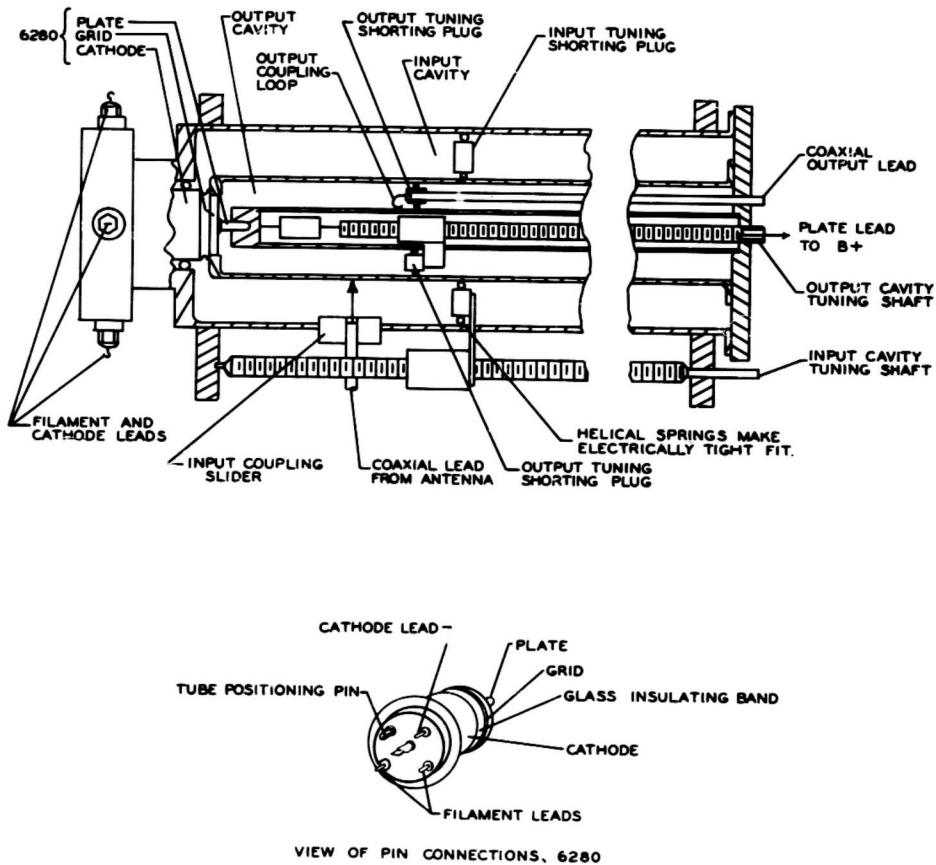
Cross Sectional View of R-F Amplifier Assembly
